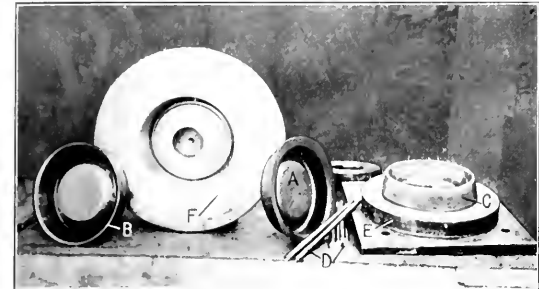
Redrawing and Finish-forming Dies for Automobile Clutch Cone
